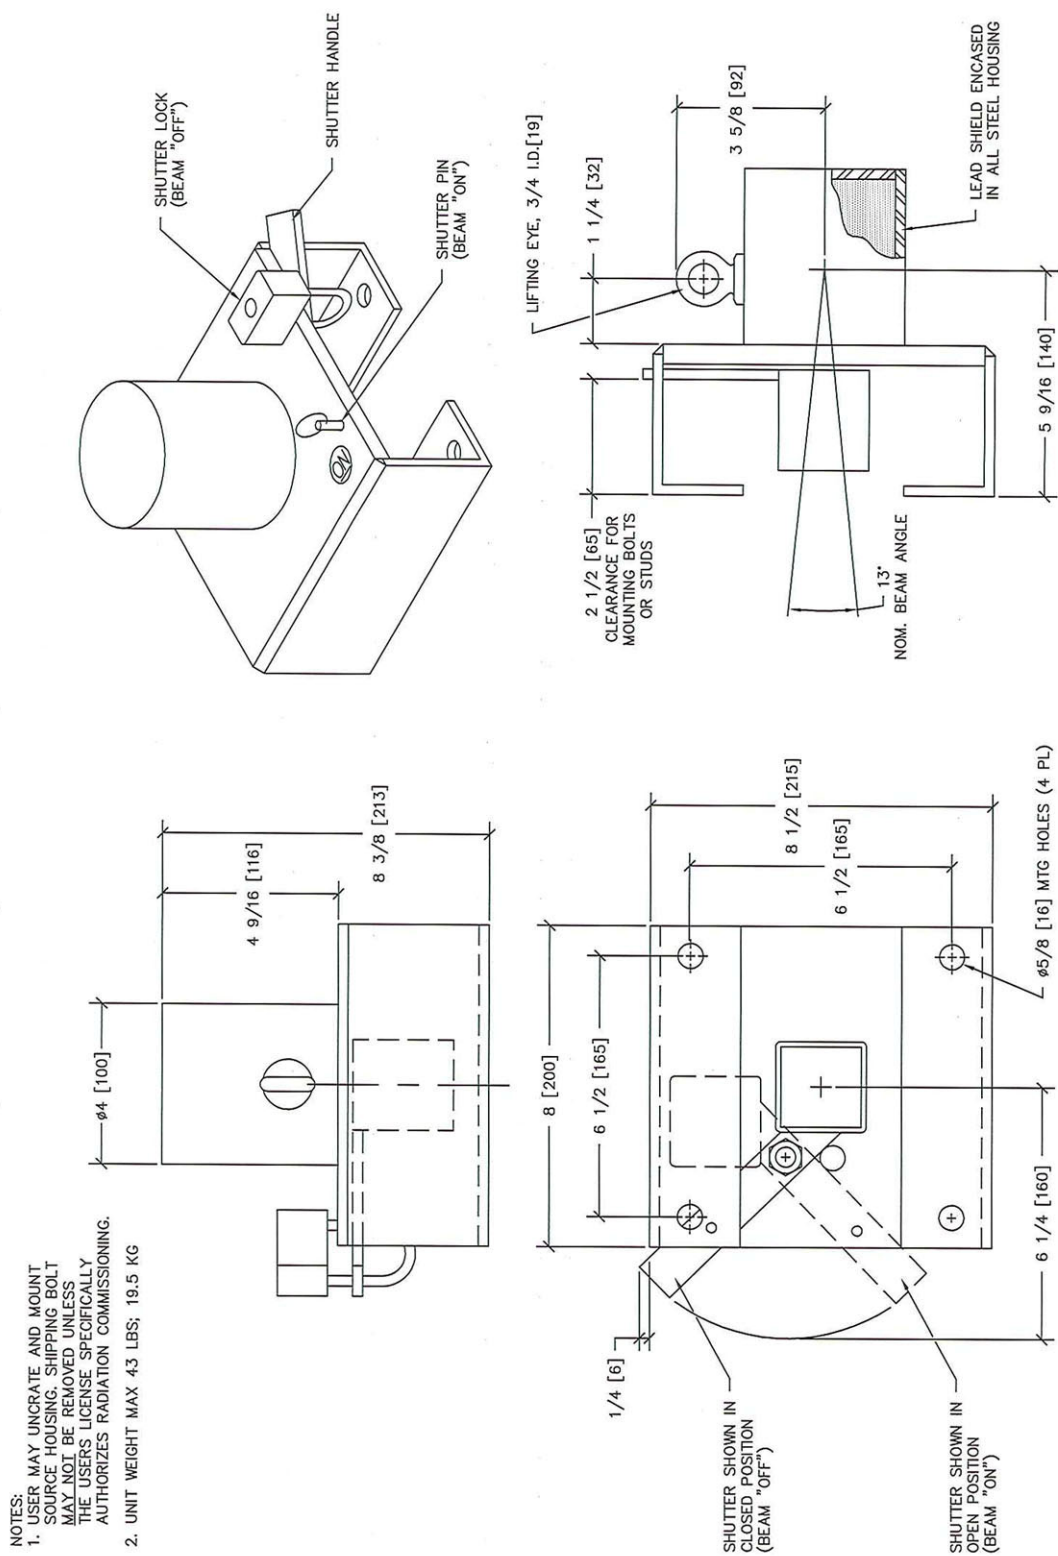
865453: Mounting dimensions, 5201 source housing, 100 mCi or less (sheet 1 of 1)
